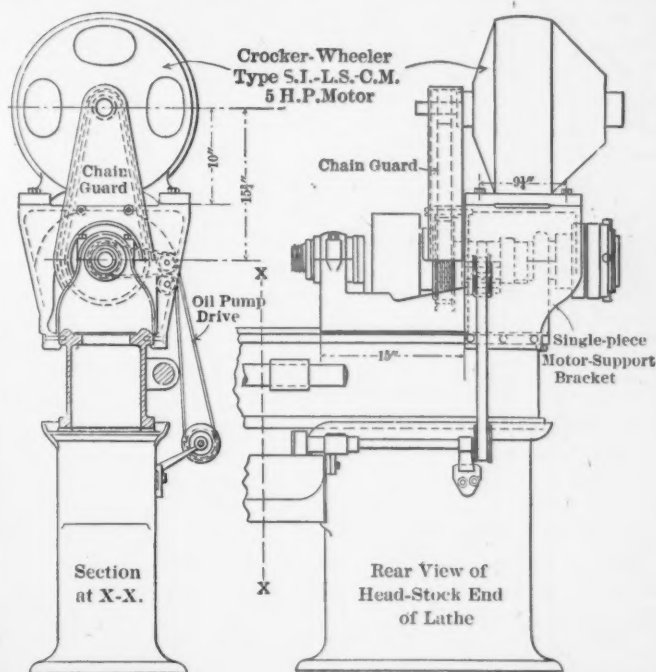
DETAILS OF APPLICATION OF THE INDIVIDUAL DRIVE TO THE JONES & LAMSON TURRET LATHE, SHOWING SPECIAL ONE-PIECE MOTOR SUPPORT.
